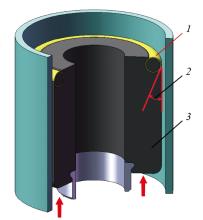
Cylindrical packer with spring anti-extrusion ring creating self-sealing effect: *1*) spring ring; *2*) wedge; *3*) rubber.
